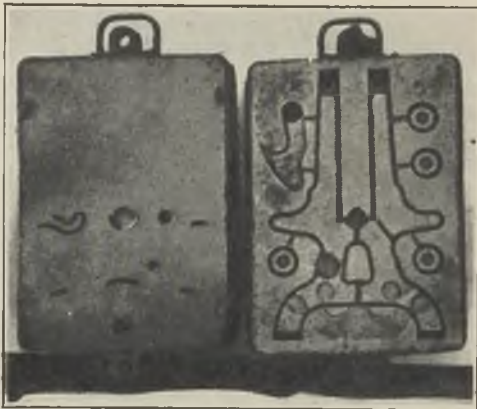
SIMPLE MOULD PRODUCED ON A PNEUMATIC MOULDING MACHINE.
